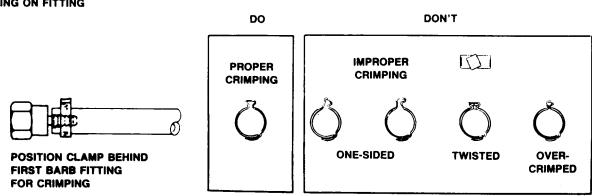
INSTRUCTIONS FOR CRIMPING TUBE CLAMPS
